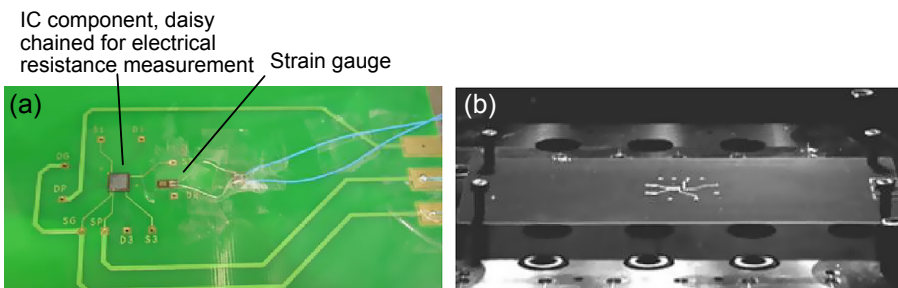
Board-level drop test set-up. (a) Strain gauge mounted near component. (b) Board mounted on shock test fixture, with component facing downward.
